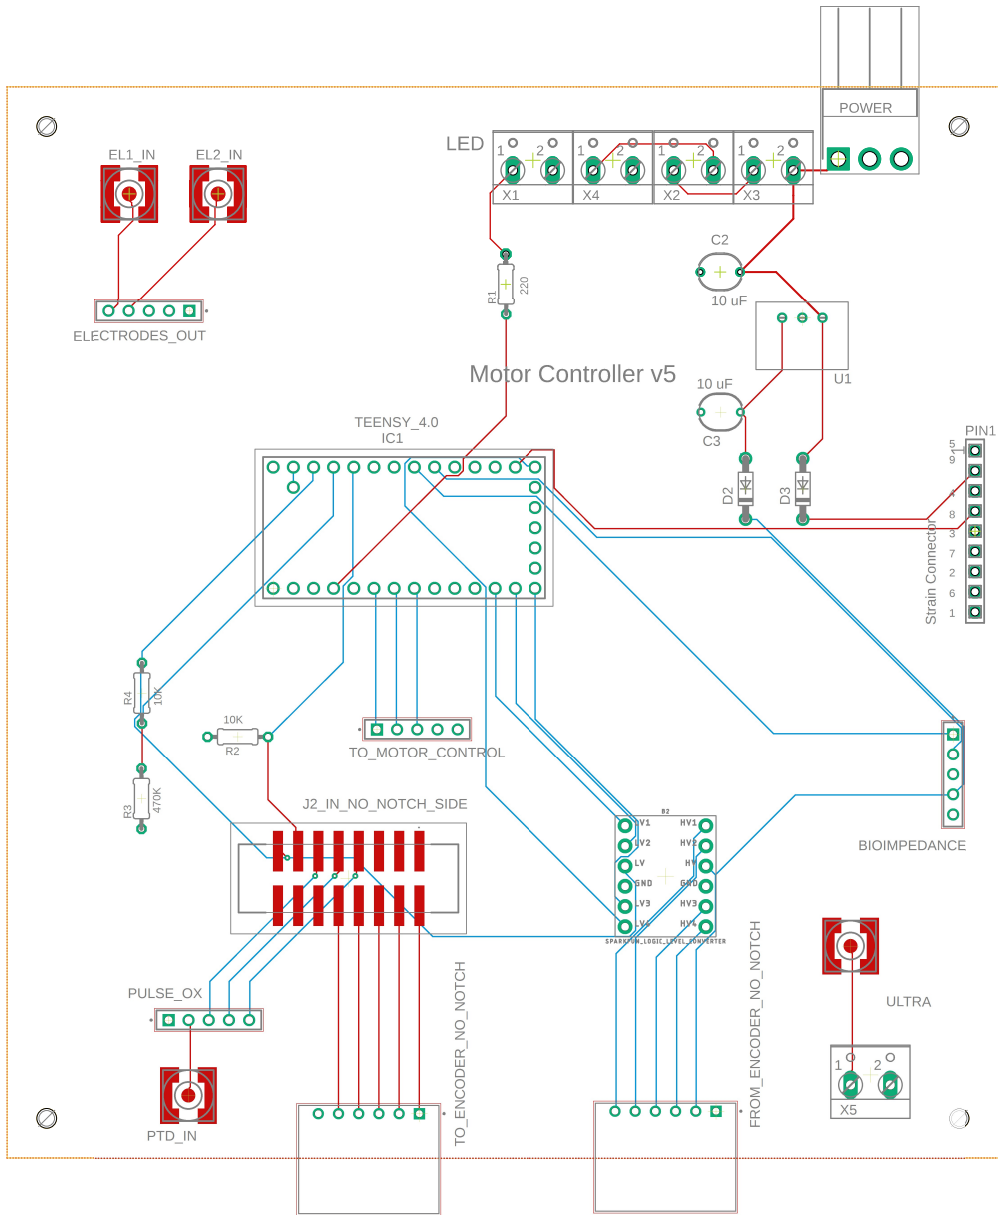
Board Layout for Motor Controller and Mixed Signal Front End for Sensor's Interface
